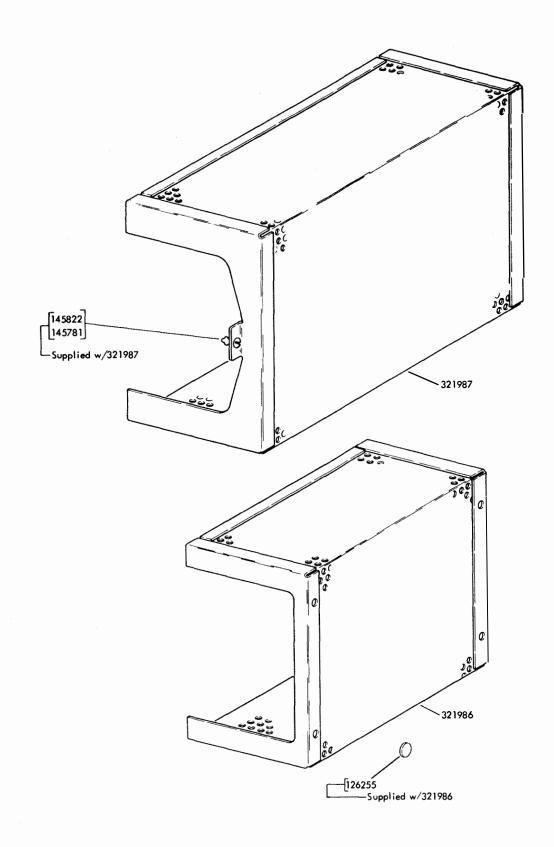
Electrical Service Assembly Covers (Sheet 1 of 2)
